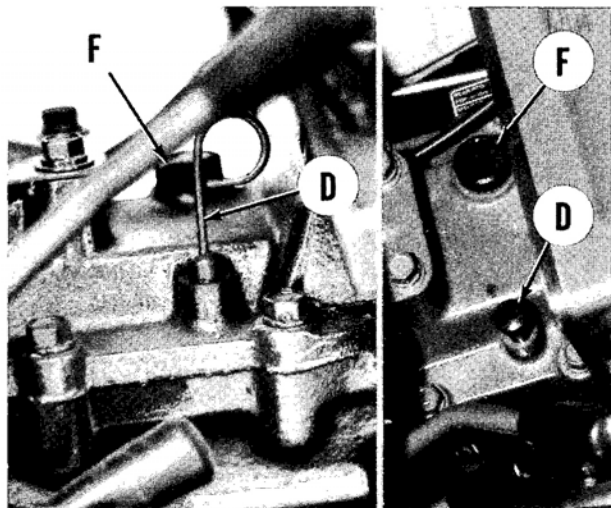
View shows transmission top cover with two different type of dipsticks (D). Maintain lubricant level at full mark on both models. Add lubricant through fill hole by removing fill cap (F).
